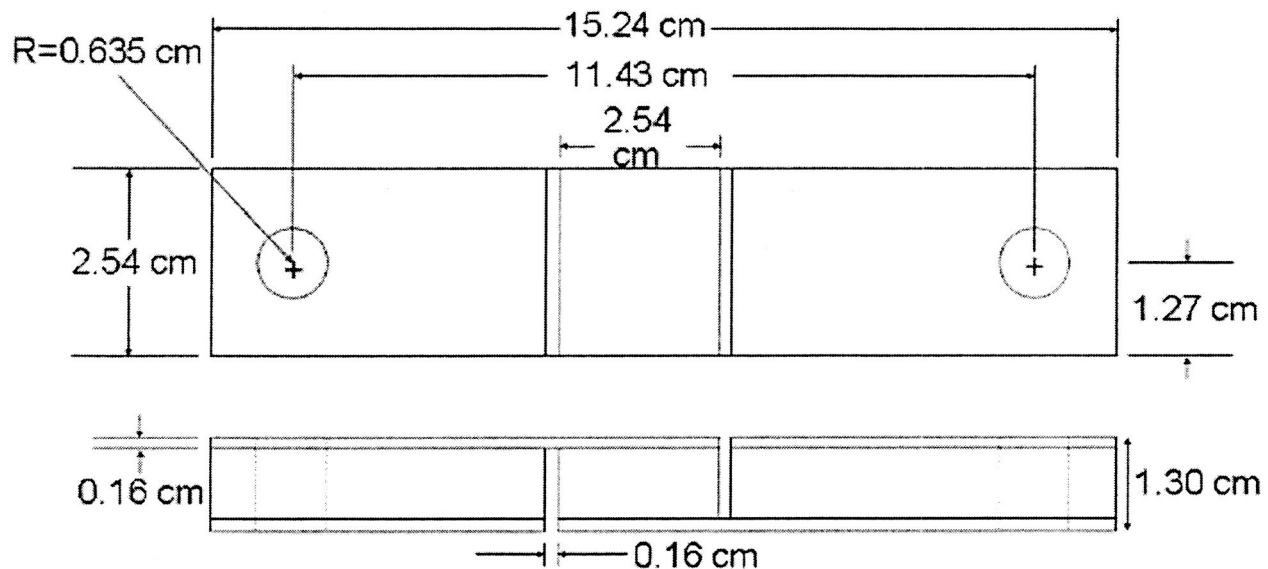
Typical specimen dimensions of the samples sectioned from the sandwich panel for shear testing.
